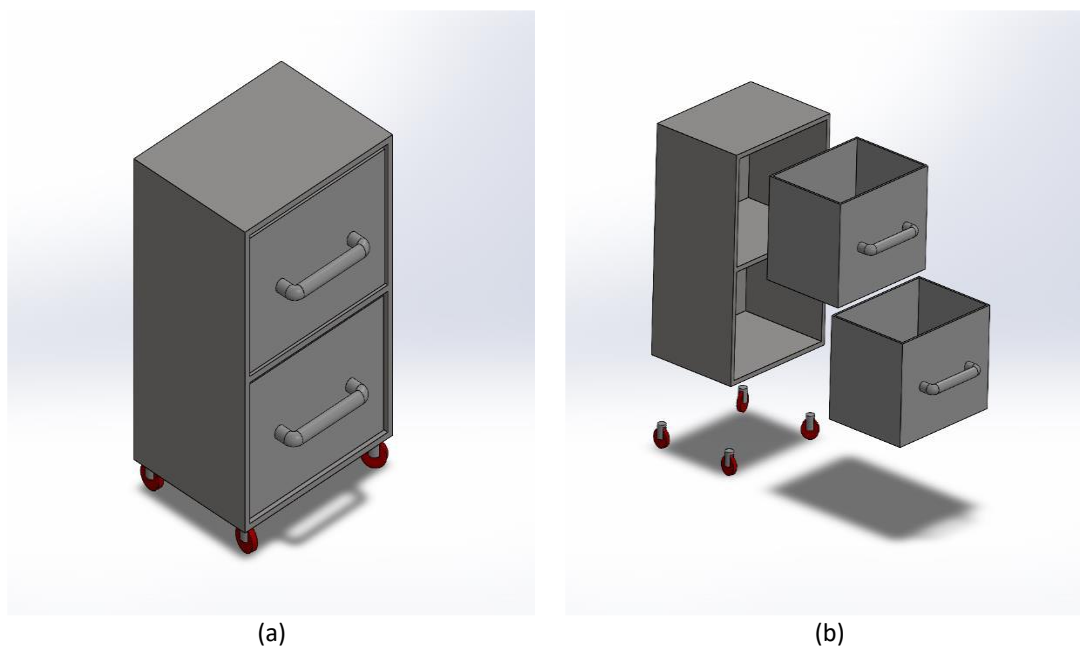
Prototype complete assembly and exploded view; (a) Prototype complete assembly, (b) Prototype exploded view
